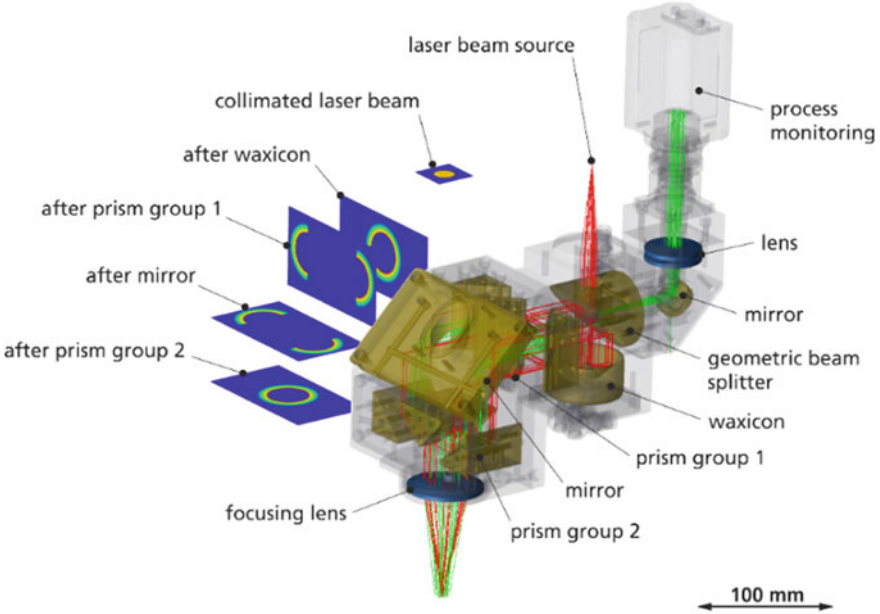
Schematic of the laser beam shaping in the coaxial wire feed processing head
